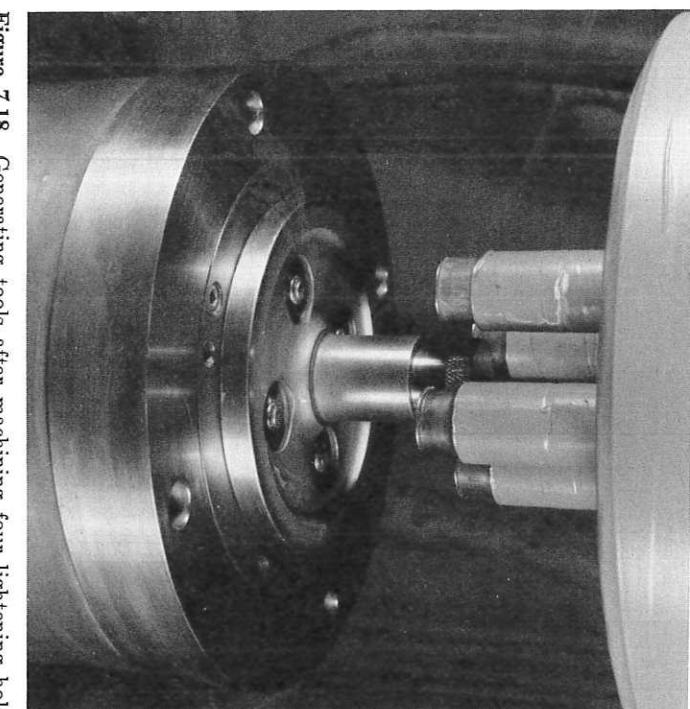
Generating tools after machining four lightening holes in a gear. At the center of each hole can be seen the small slug of material isolated by the machining. (Courtesy of the General Electric Company.)
